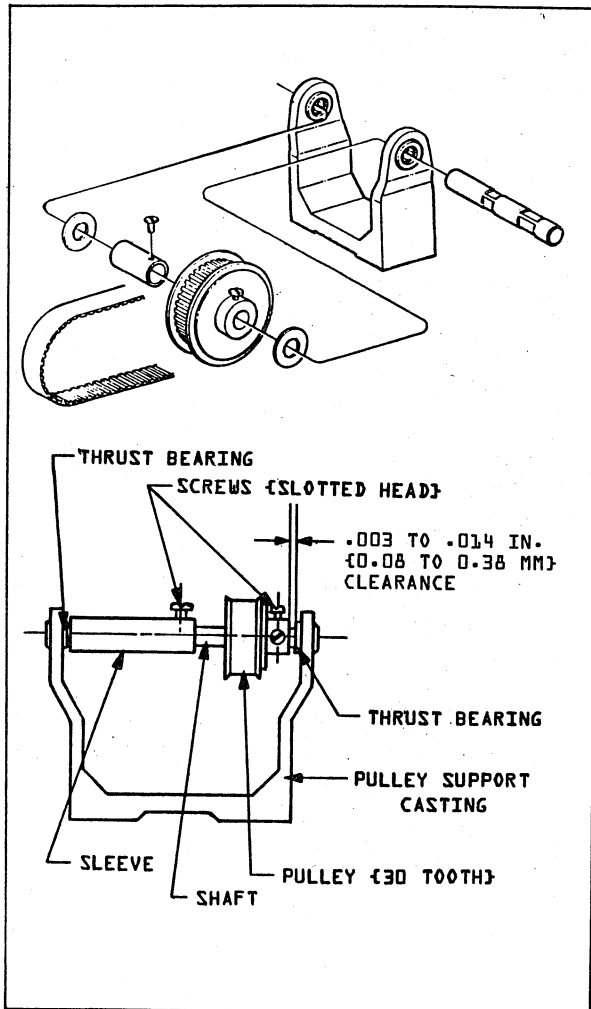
PULLEY ASSEMBLY-LEFT HAND (DISASSEMBLY AND ASSEMBLY)
